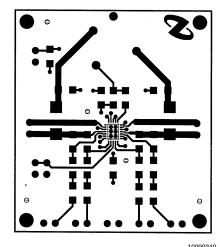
Recommended LQ PC Board Layout: Component-Side Layout
